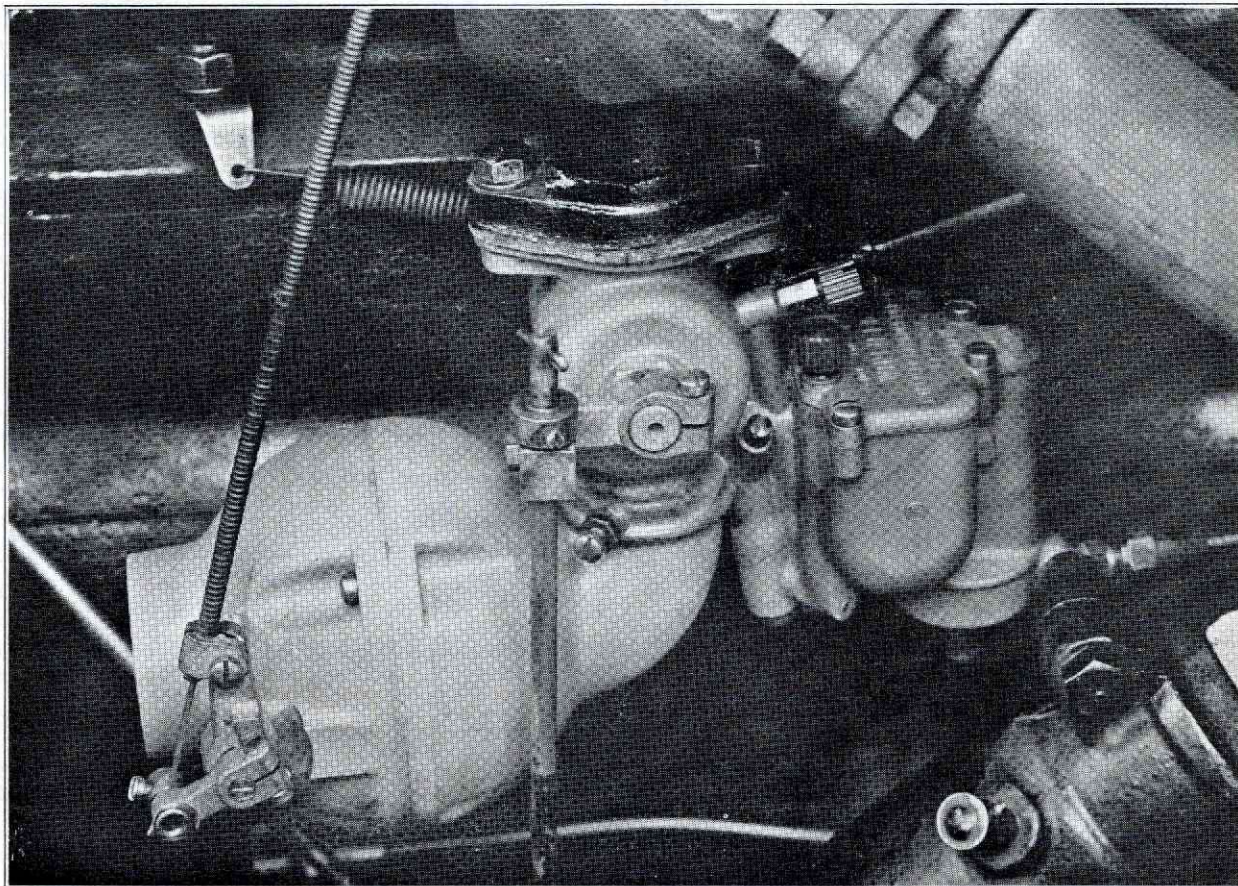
PHOTO SHOWS INSTALLATION ON 1928 WILLYS-KNIGHT 70-A
